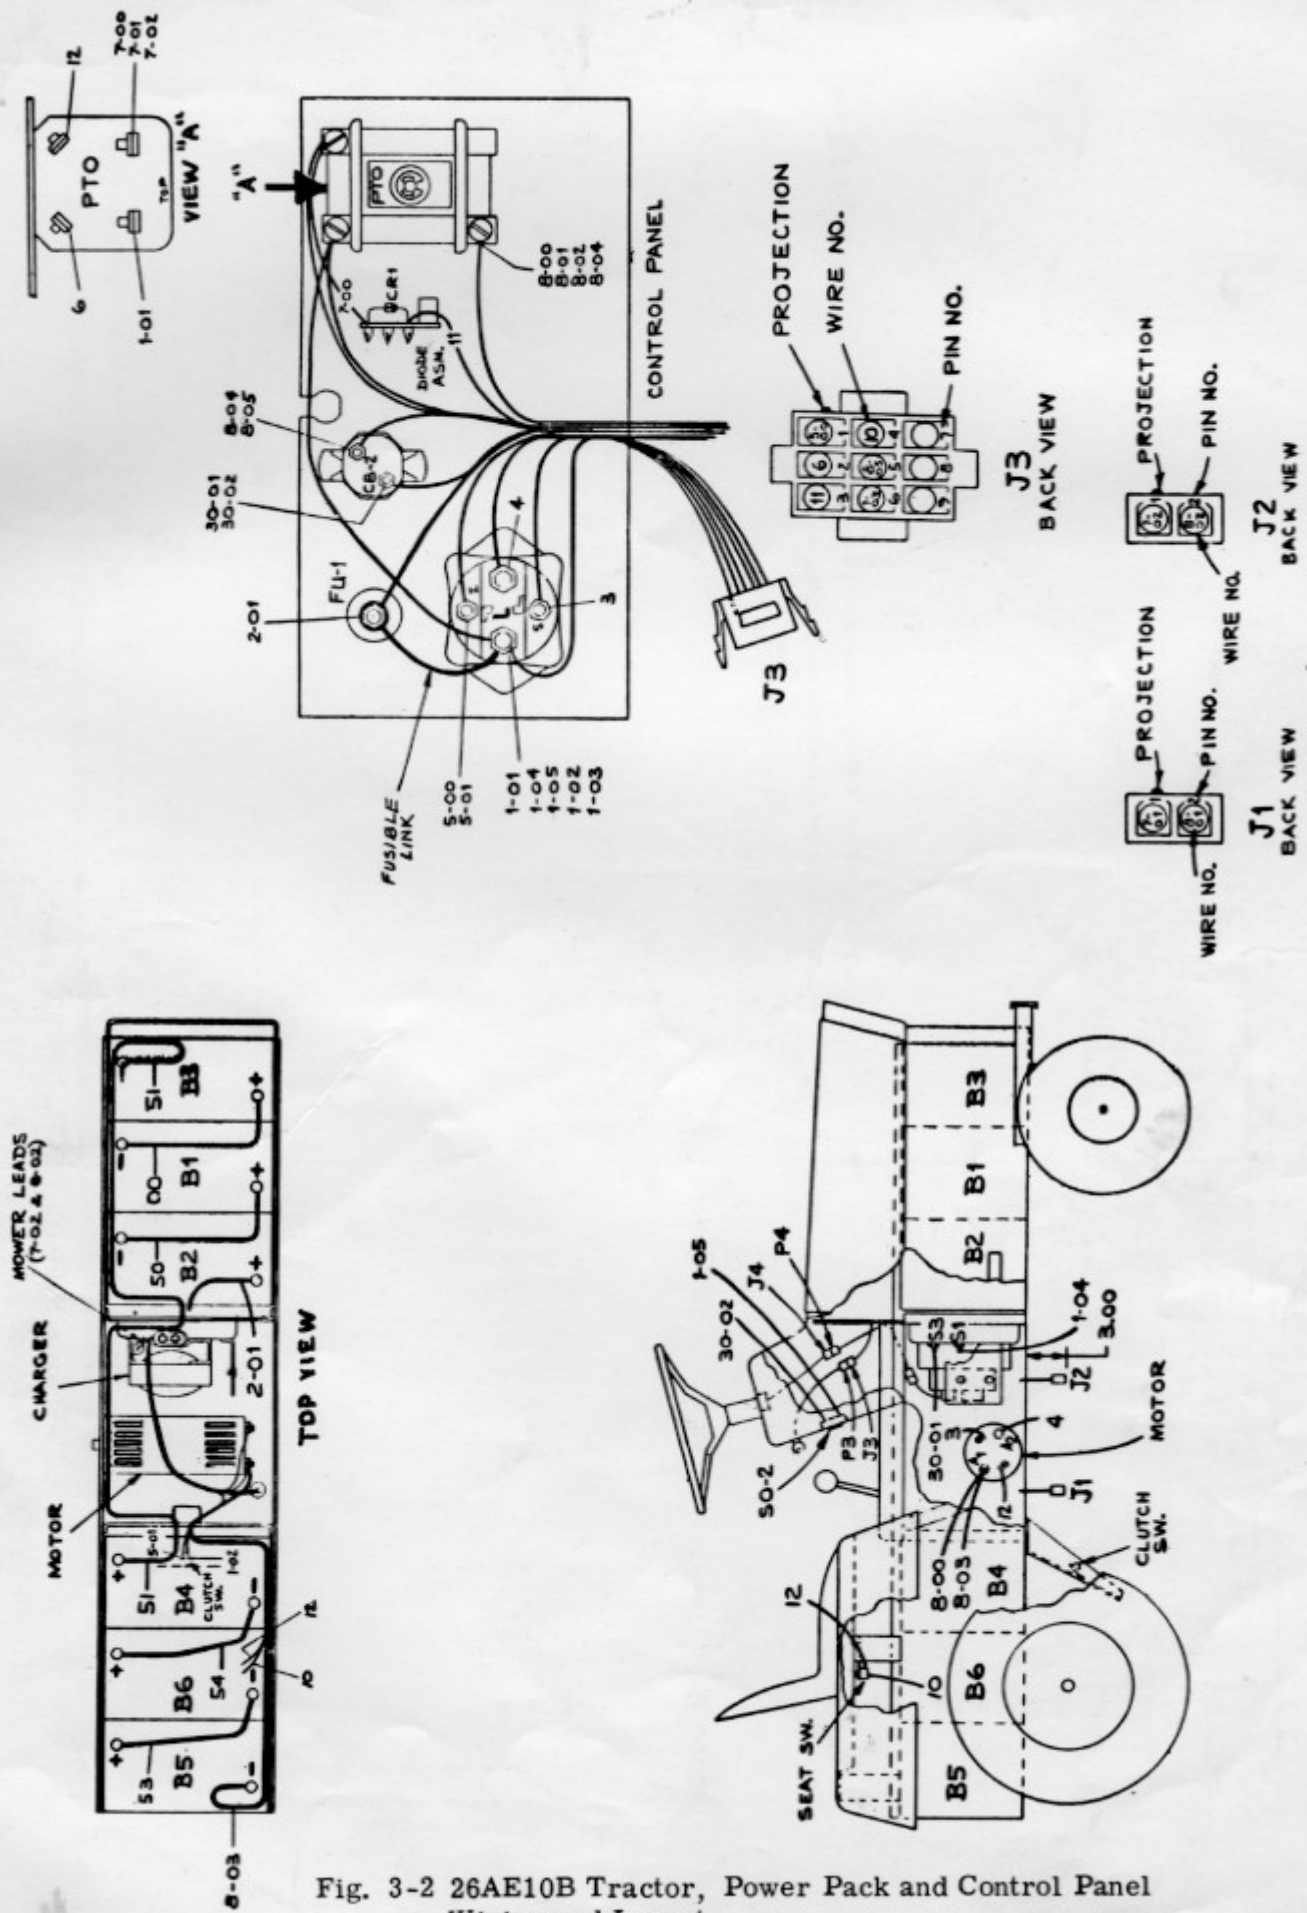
26AE10B Tractor, Power Pack and Control Panel Wiring and Layout
